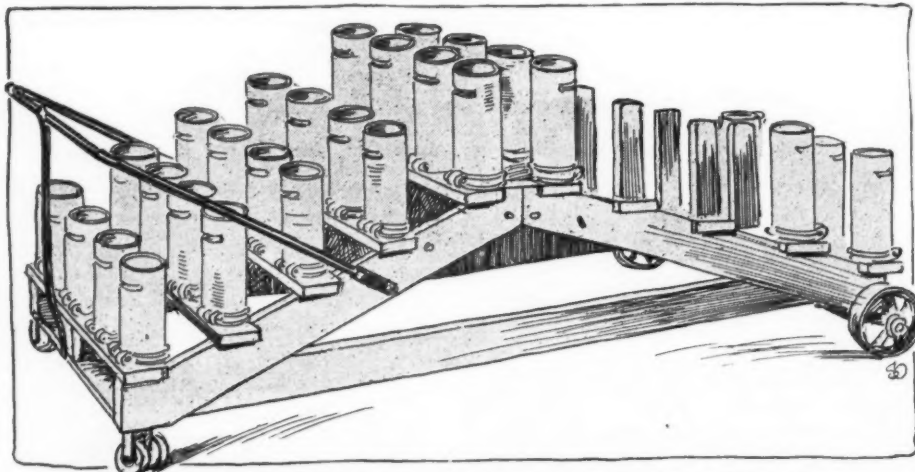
Special hand truck carrying fifty sleeves used in machine shop
